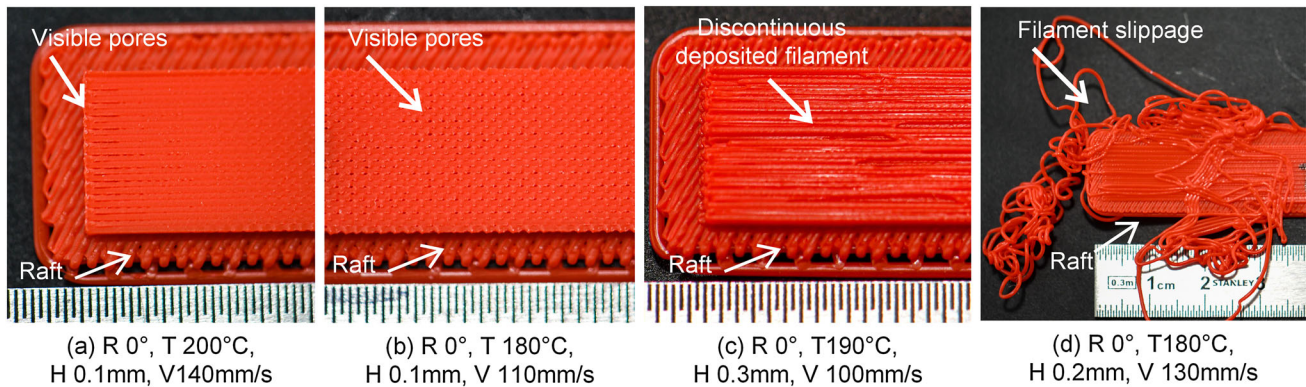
Defects of specimens printed under critical conditions. (a) Visible pores at the end of specimen printed at small layer height and high deposition speed; (b) visible pores at the middle of specimen printed at small layer height, low nozzle temperature and high deposition speed; (c) discontinuous deposited filaments at big layer height and high deposition speed; (d) slippage of deposited filaments observed at low nozzle temperature, high deposition speed, and medium layer height.
